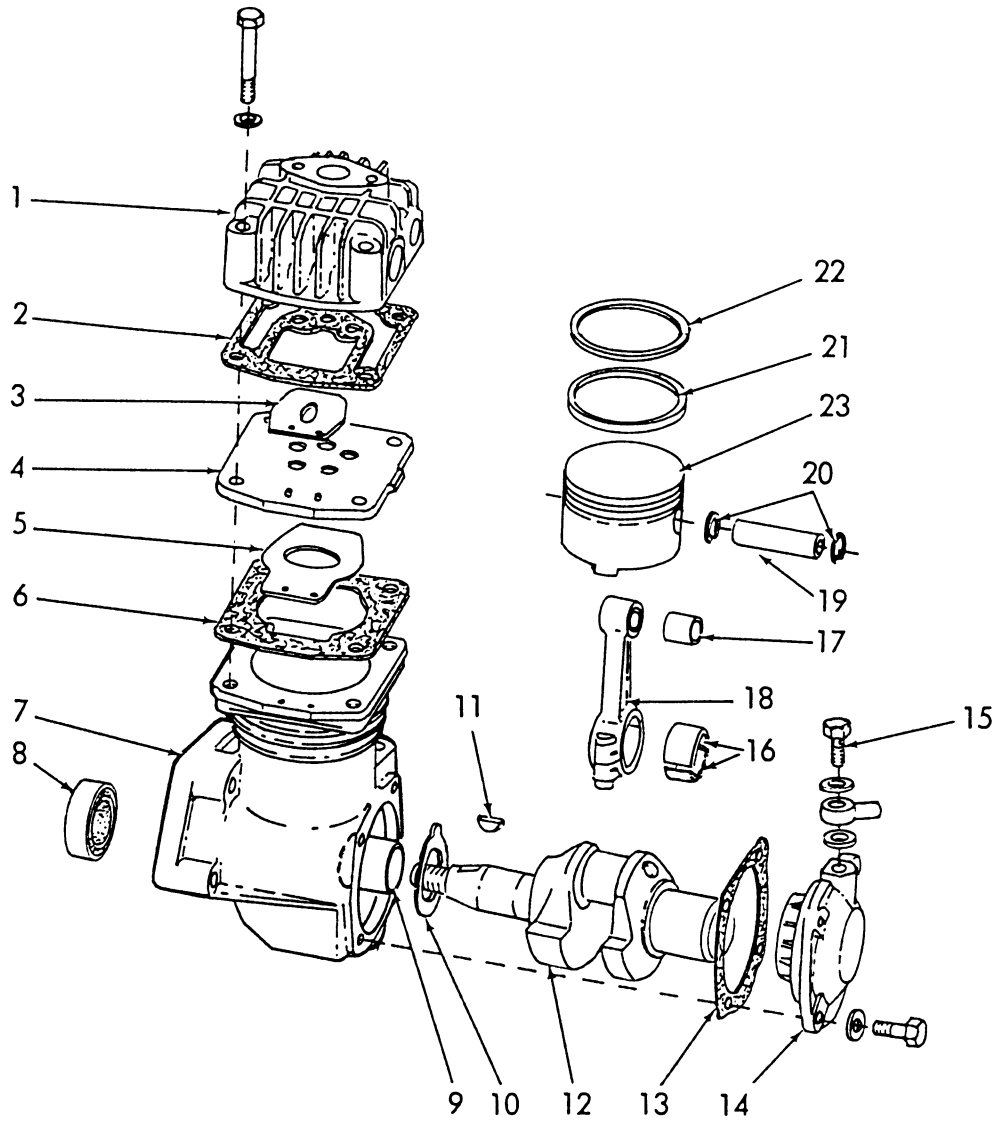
COMPRESSOR ASSEMBLY (Marelli model)
